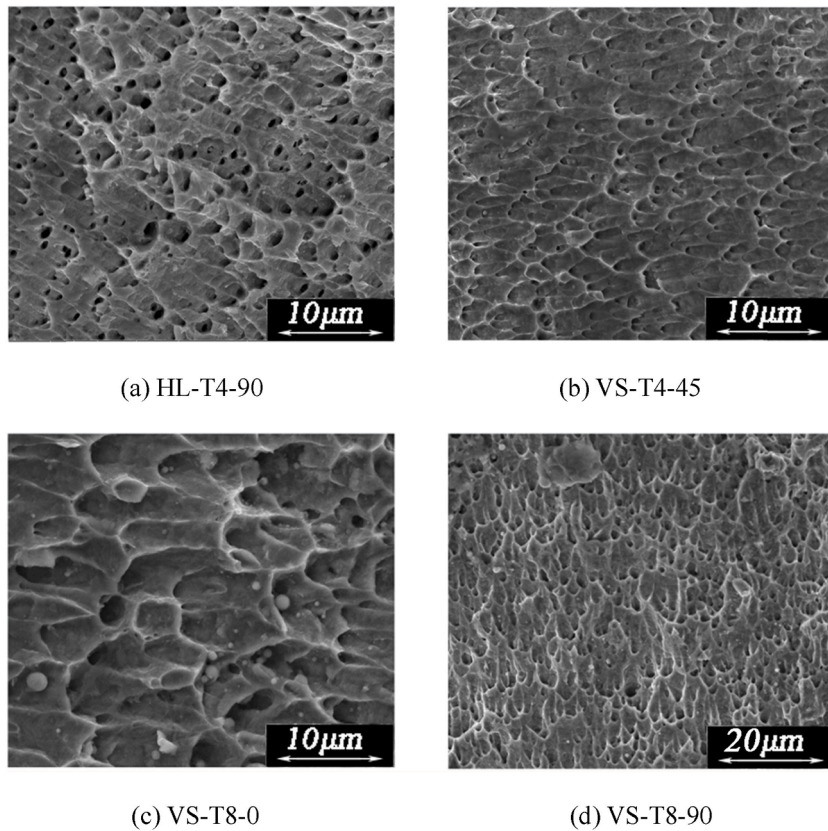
Inclined dimples on fracture surfaces.
